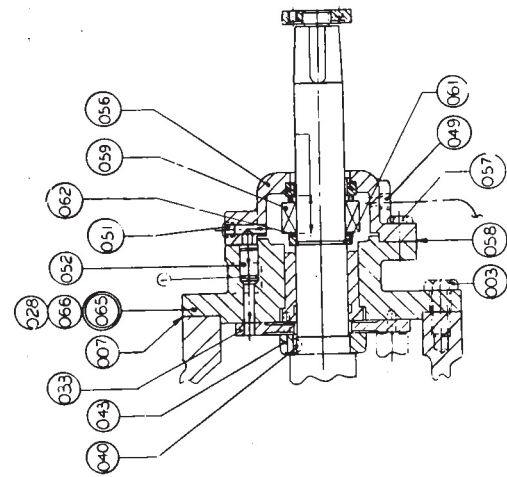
VIEW OF INBOARD END COVER SEAL WITH SQUARE RING SEAT
